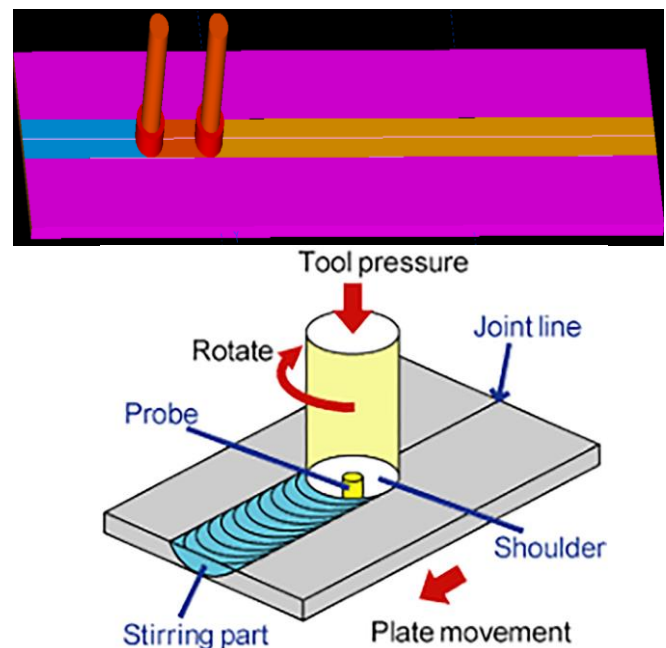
Friction Stir welding (I) Twin tool setup (II) single tool [1]
